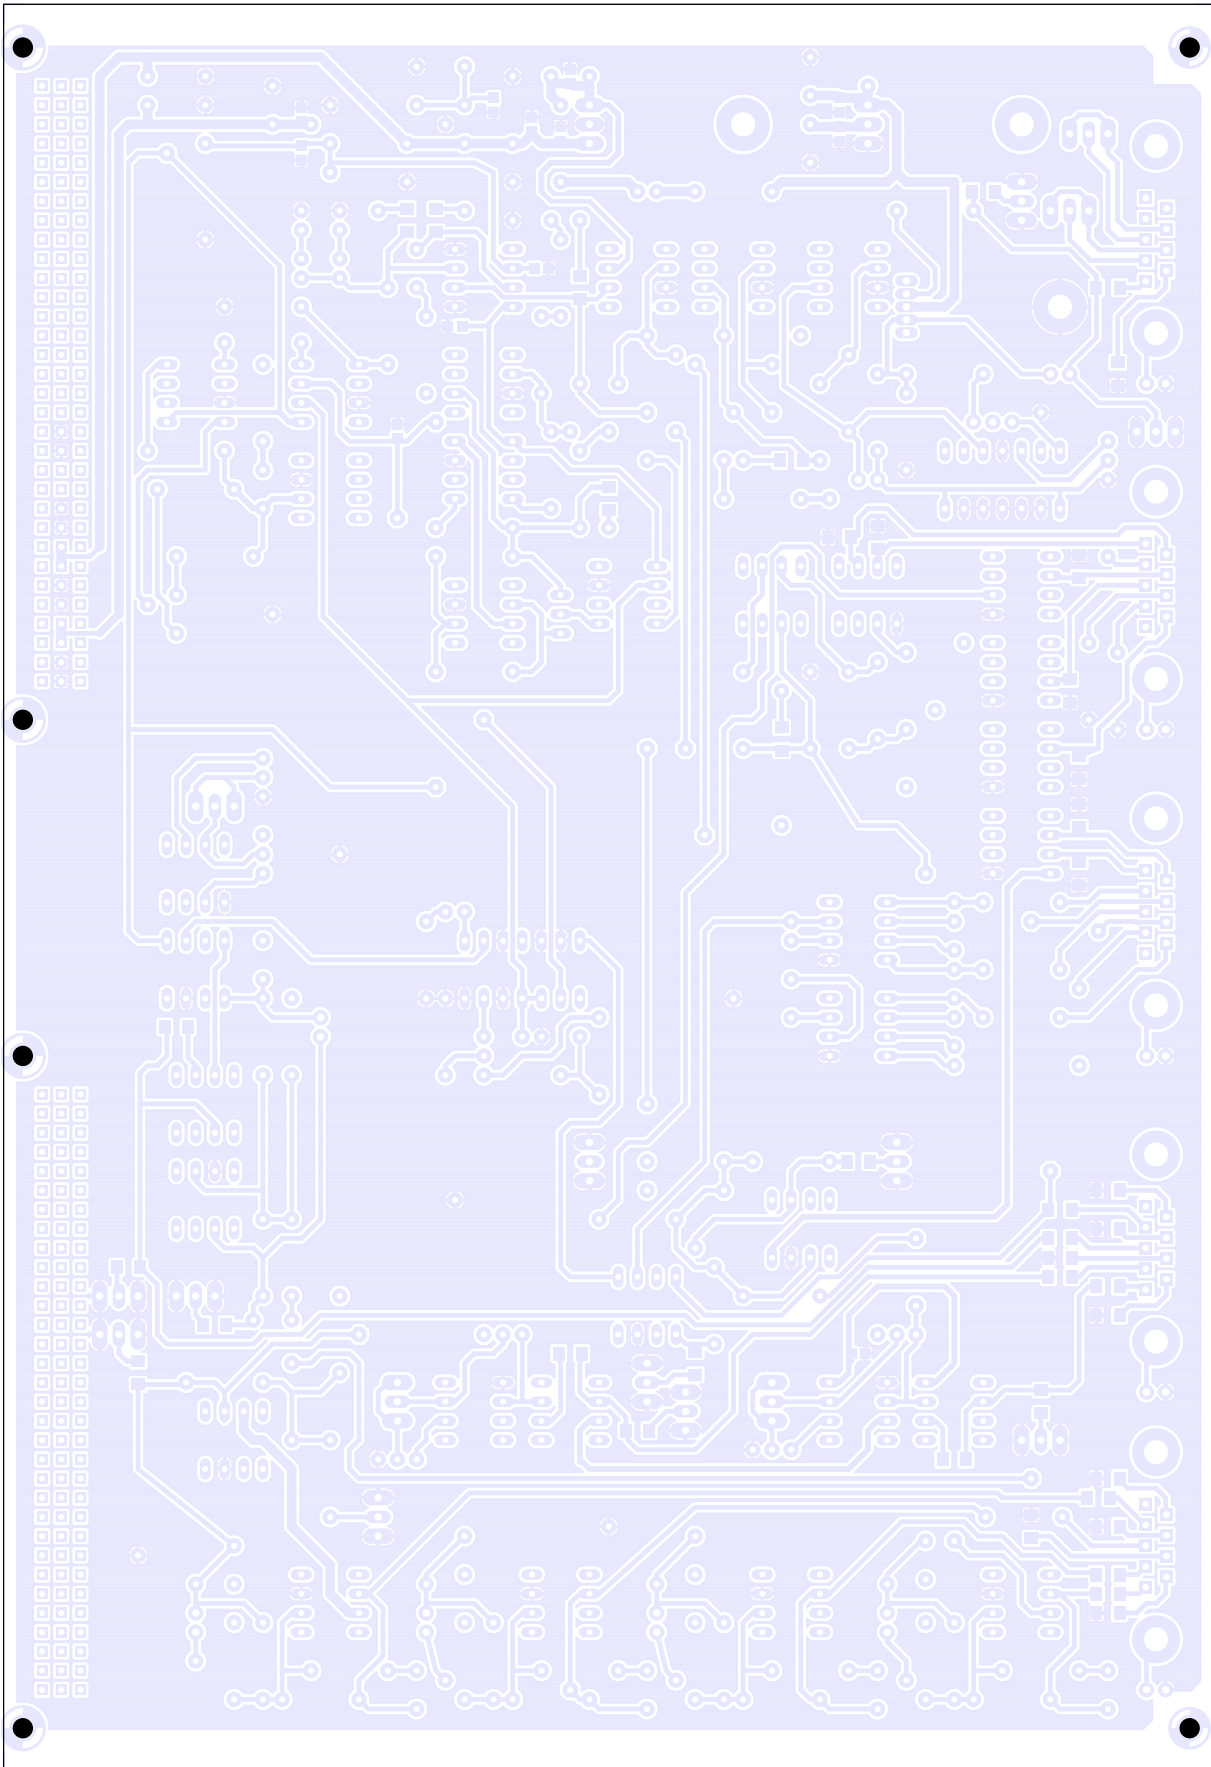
Board bottom view showing drills with 2.7 mm (0.106 in) diameter
